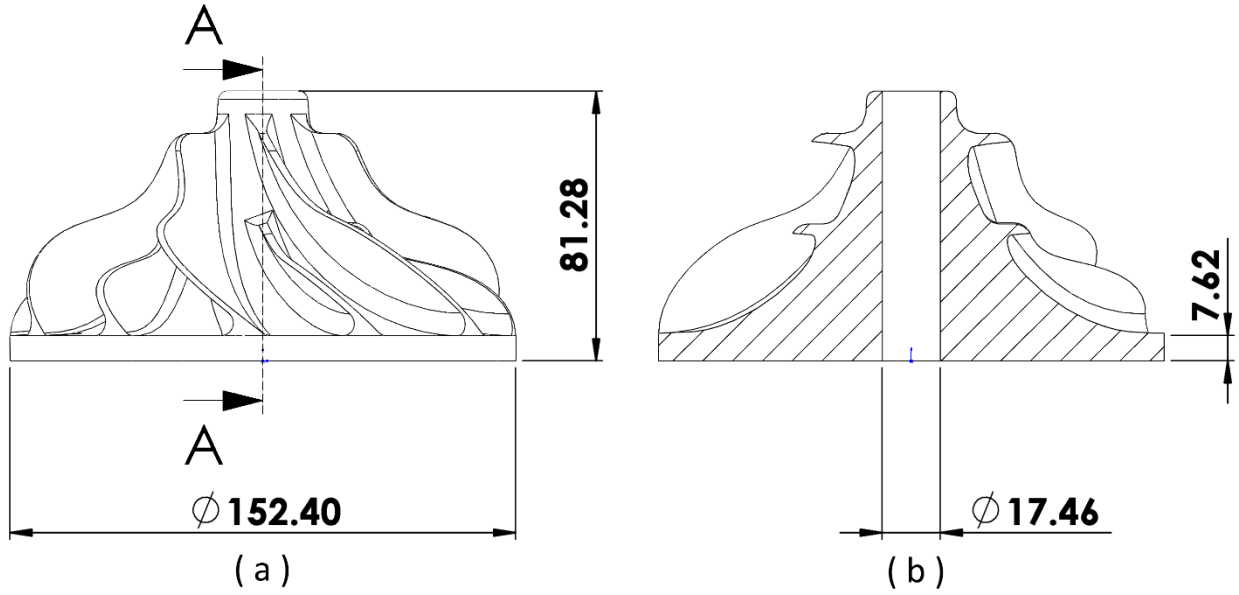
(a) front view and (b) A-A section view of the impeller in 2D with its essential dimensions.
